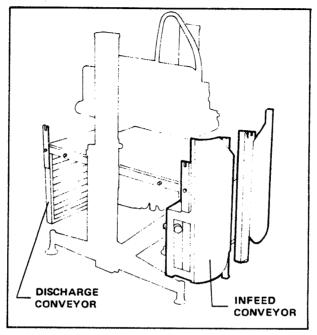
INFEED & DISCHARGE CONVEYOR SET-UP
